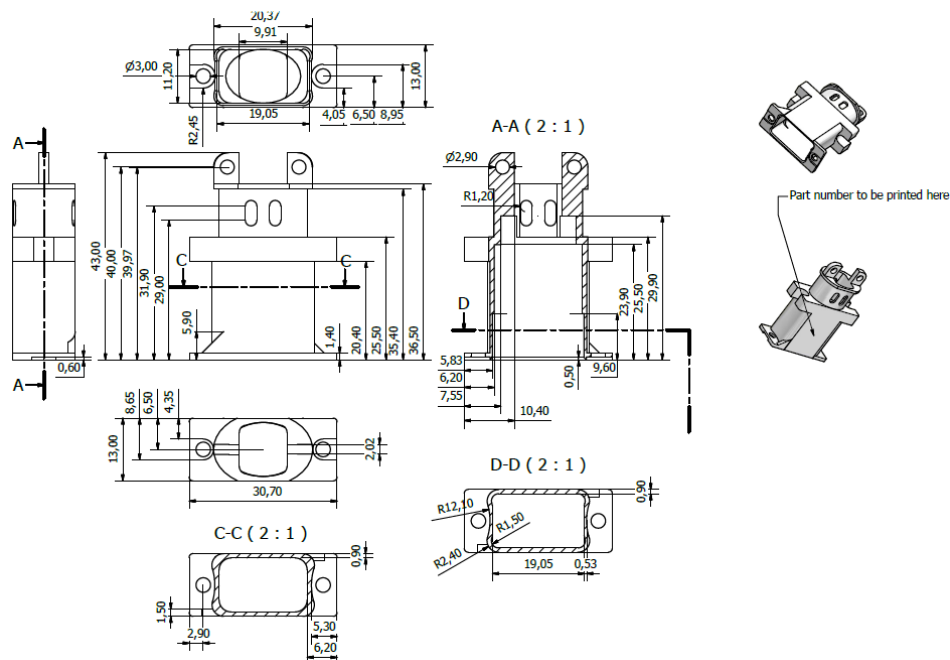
ACD/BAC/004 mechanical drawing (measurements in millimeters)
